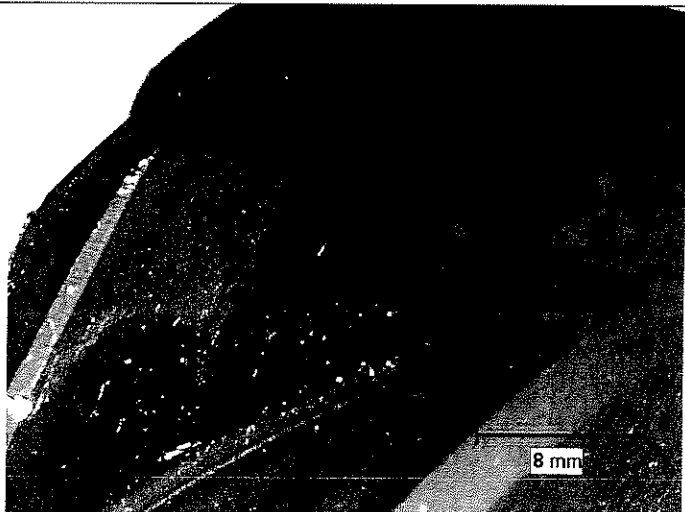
HEEL END OF GEAR SET #2 @ 5X.
